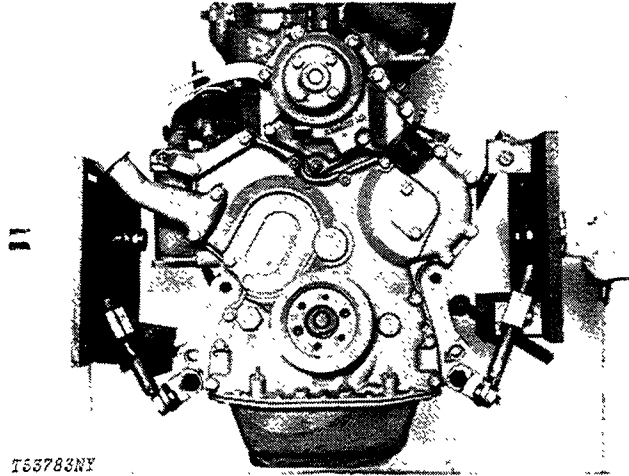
Three or Four Cylinder Engine Mounted in D01003AA Engine Stand
